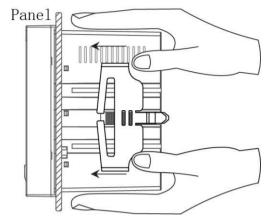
Fixed on the panel by the mounting blocks
